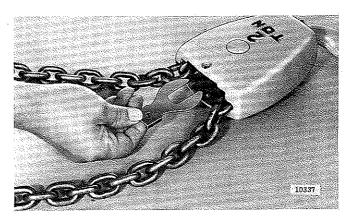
Removing Sprocket Pin Lock On 2 and 3 Ton Lower Block Assembly (Coil Chain Model)
